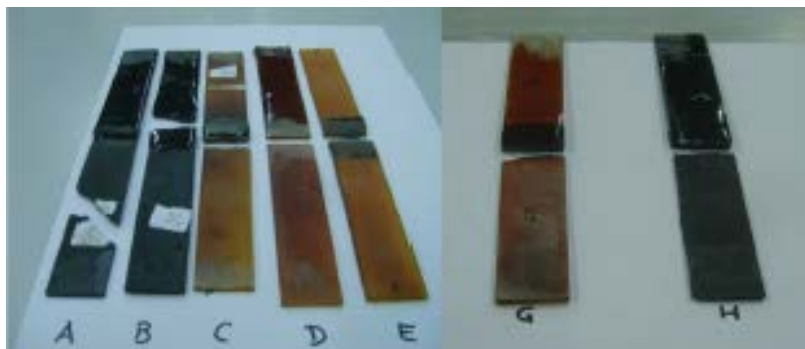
6 Detail of failure of bonded joints occurred in lap joint shear tests.
